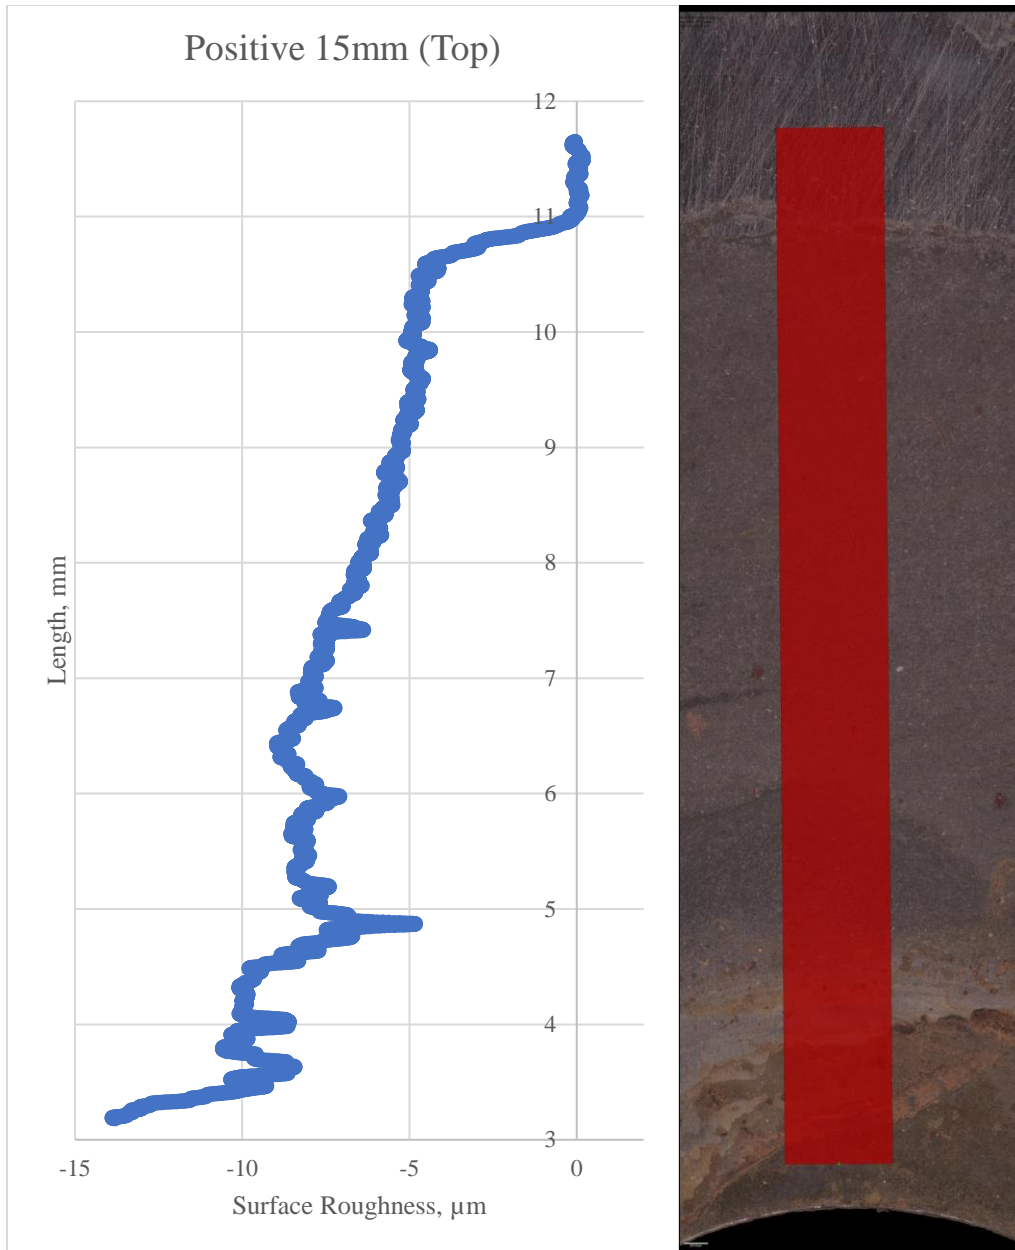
The above figures illustrate corrosion damage of the carbon steel of the top side of the bolt of the Positive 15mm coupon using surface roughness measurements from the 3D microscope.
